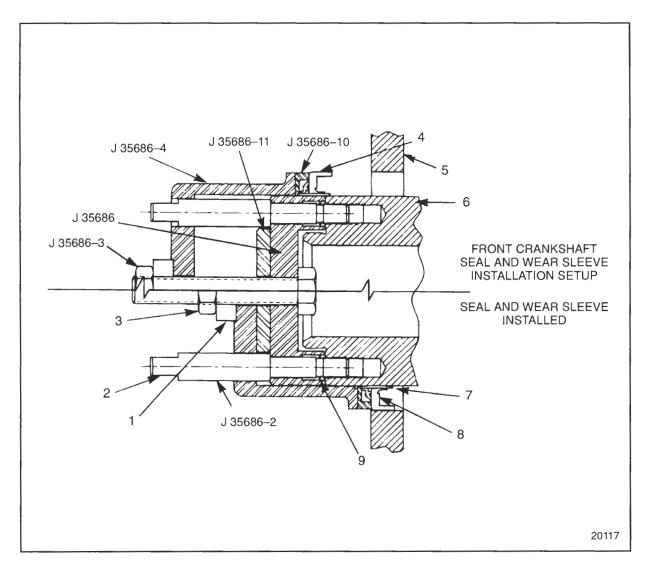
Front Crankshaft Oil Seal/Sleeve Installation Tool Set
